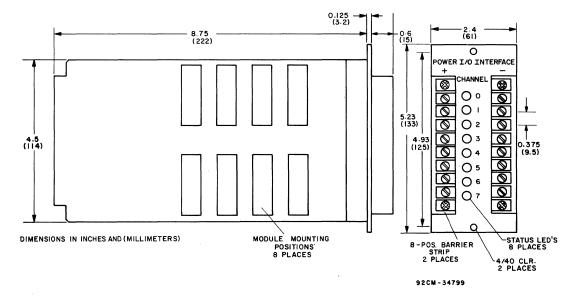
Dimensions of MSIM 20 Power I/O Interface.
